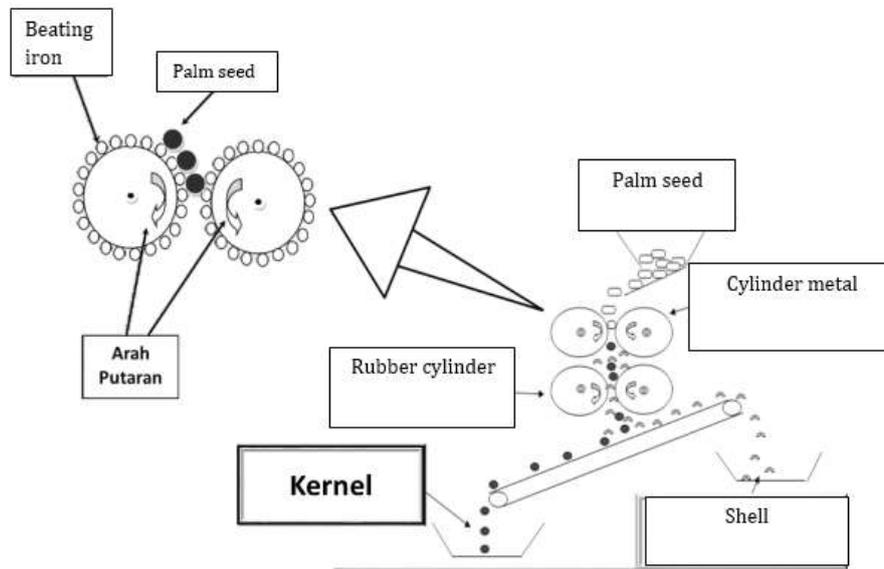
Drawing sketch for cracking machine of oil palm shell two cylinder
